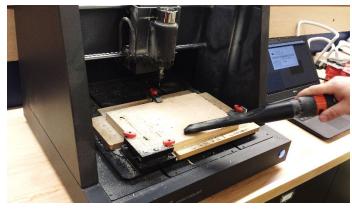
Users vacuumed off their messes after using the CNC milling machine.
